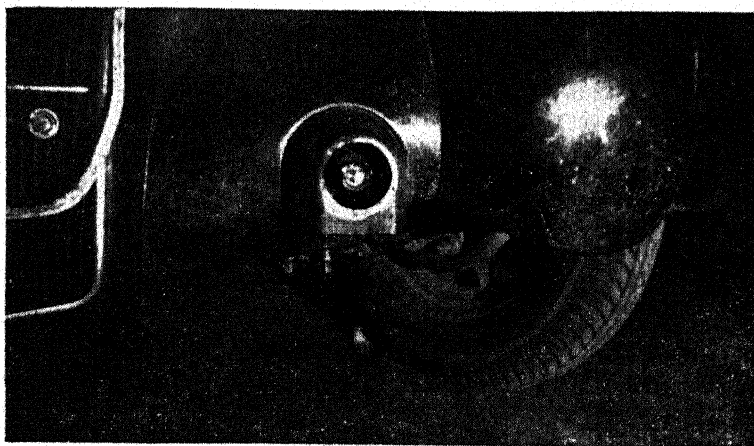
Arc welding is handiest means of removing broken studs.
